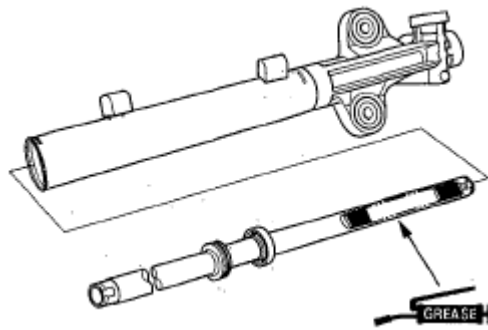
Identifying Multipurpose Grease To Steering Rack Teeth
